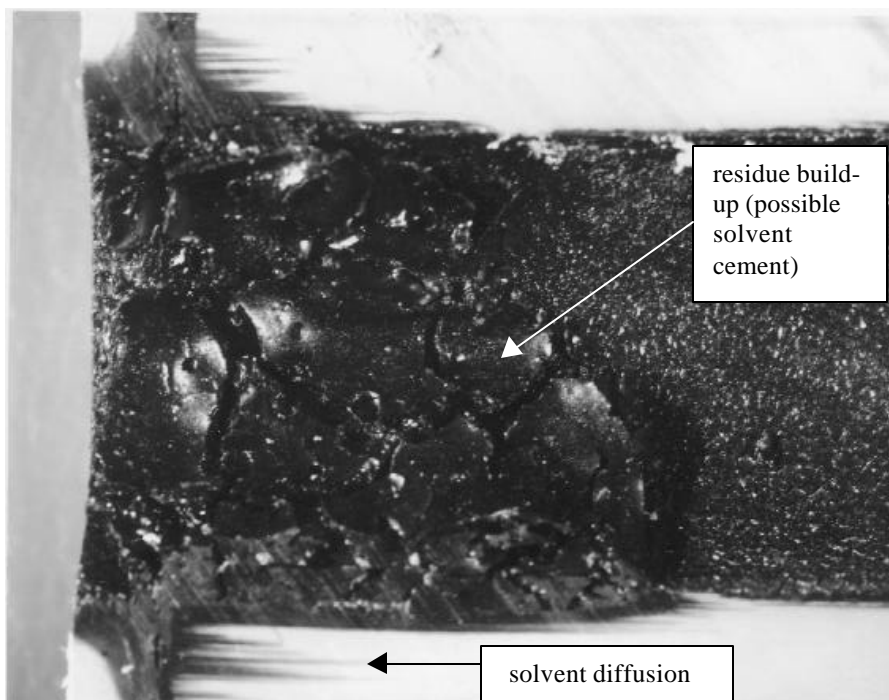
Closer view of adapter fitting/piping cross-section (Neg#54980, 5X)
